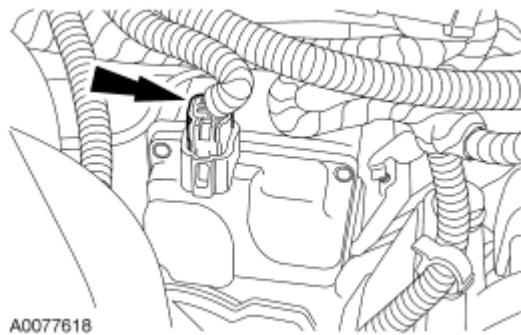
Locating Intake Manifold Runner Control Electrical Connector
